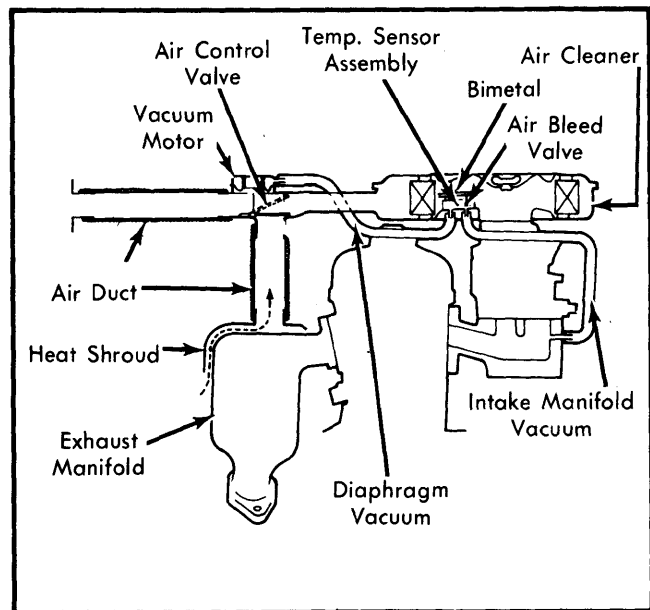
Sectional Drawing of Thermostatic Air Cleaner System (Vacuum Motor Type Shown)
